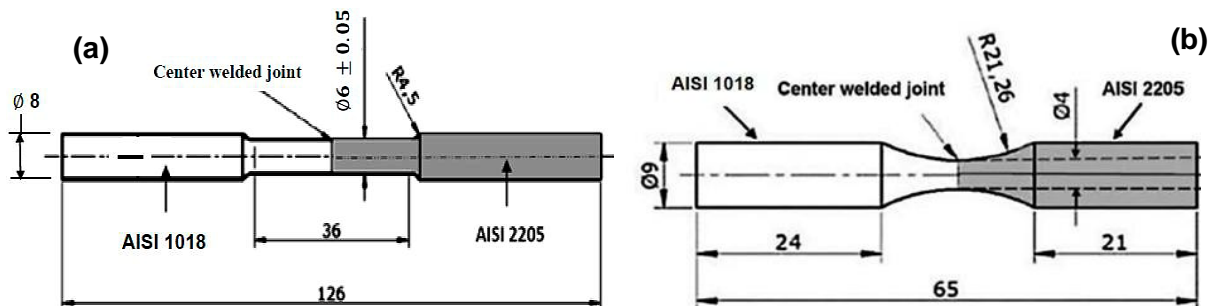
Sketch showing measurements for Tensile test specimens (a); Fatigue test specimens (b)
